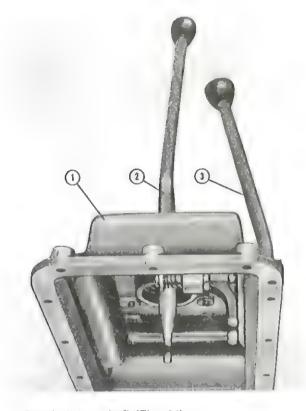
Removal of the P.T.-O. and belt-pulley drive rear housing.
